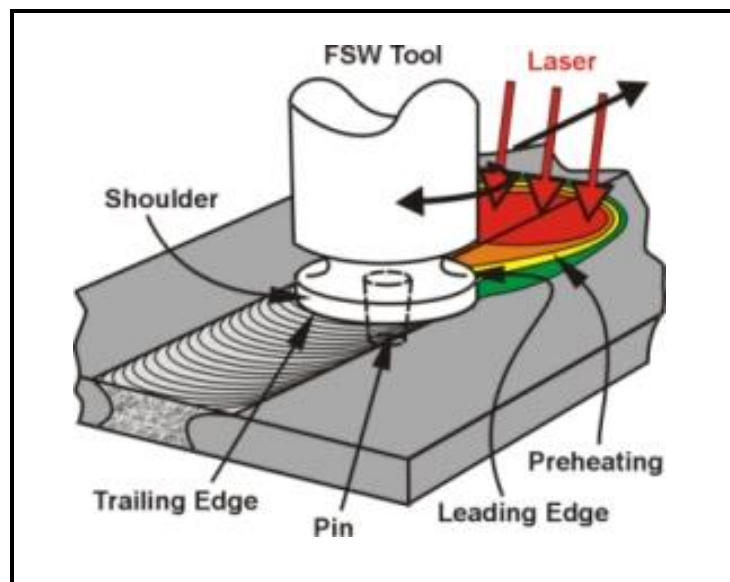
A schematic representation of laser assisted friction stir welding process
